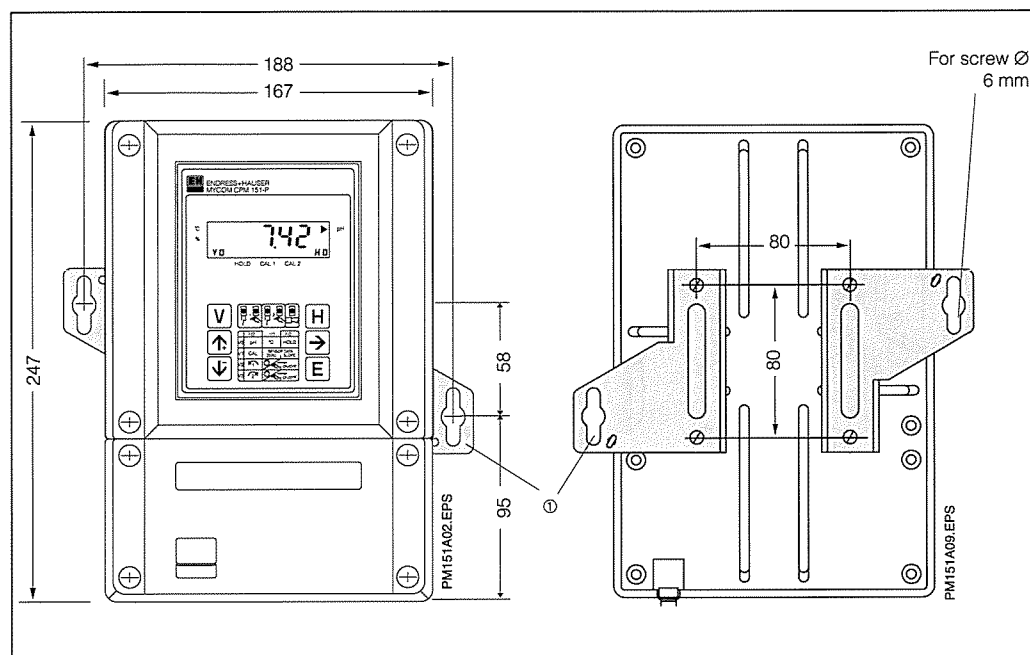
Dimensions of Mycom CPM 151-P (left)
